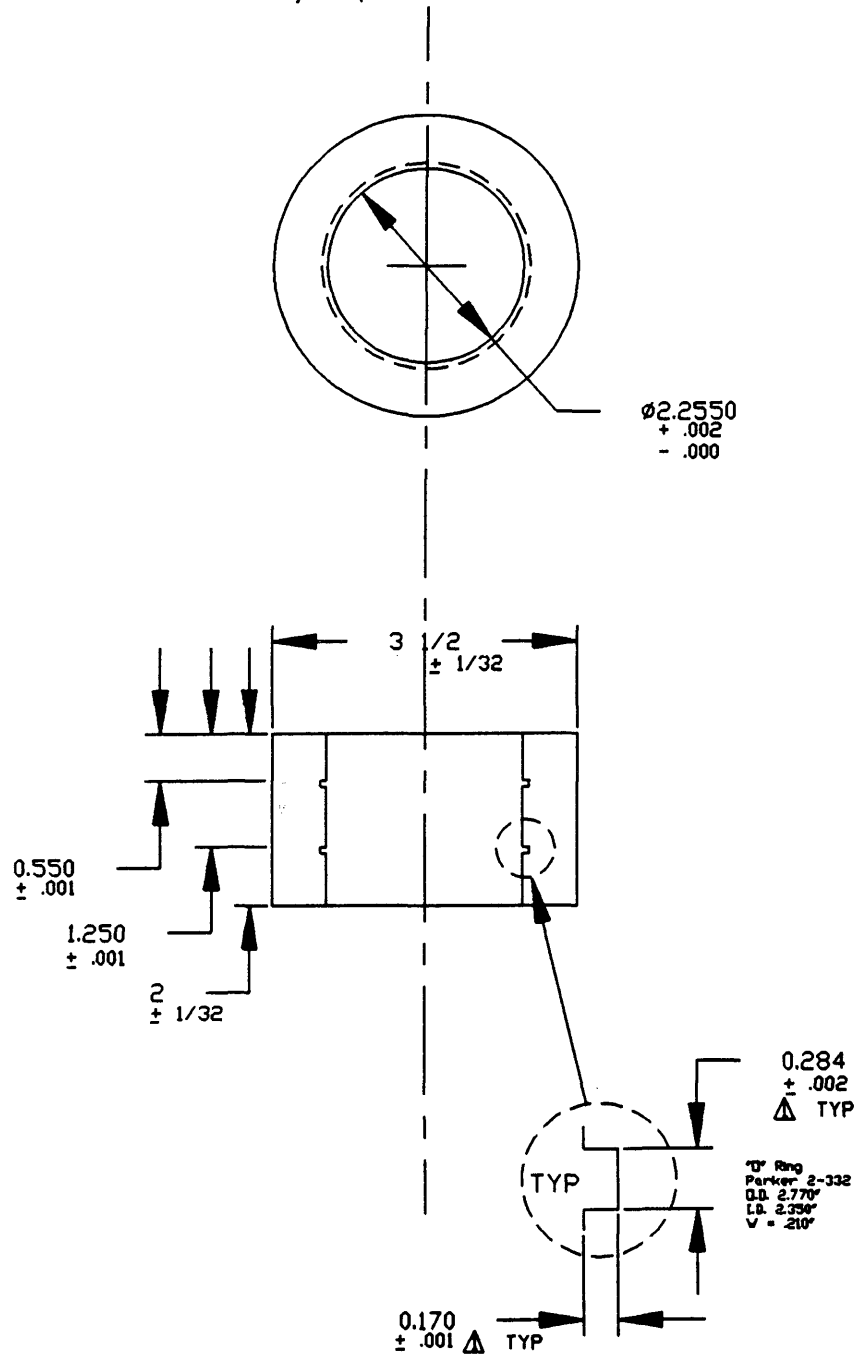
Top Plate Ram Guide, Material Stainless Steel,
